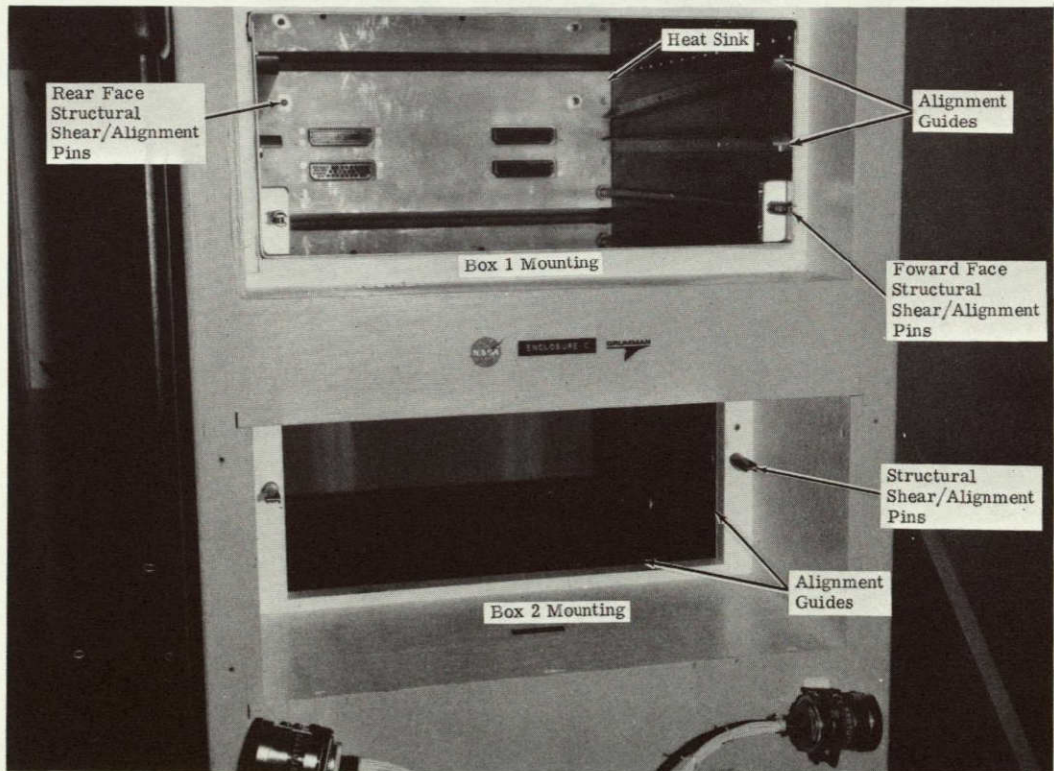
Boxes 1 & 2 Mounting Provisions On Enclosure C
